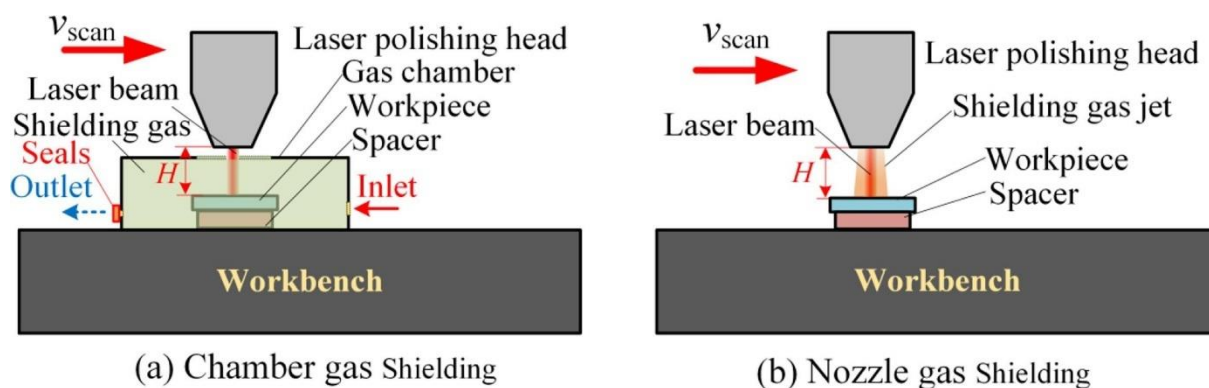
Chamber gas shielding and nozzle gas shielding (Xu et al., 2023)
